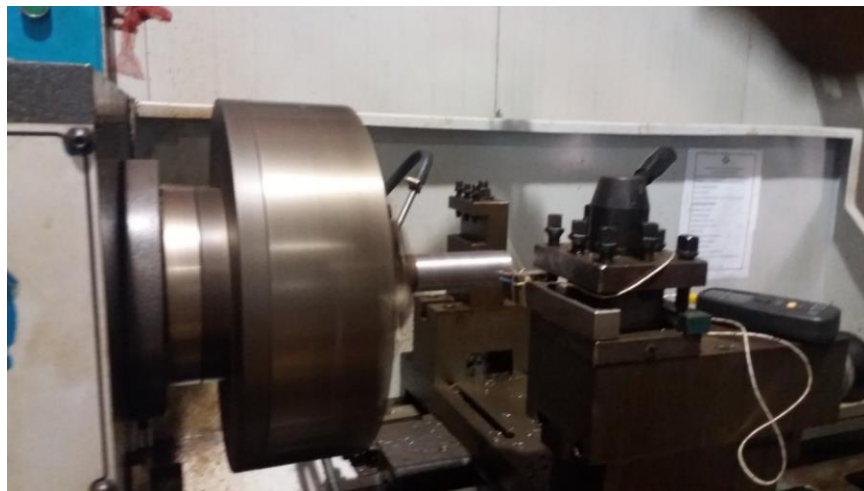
Machining of AISI 1045 using carbide insert tool without heat pipe
